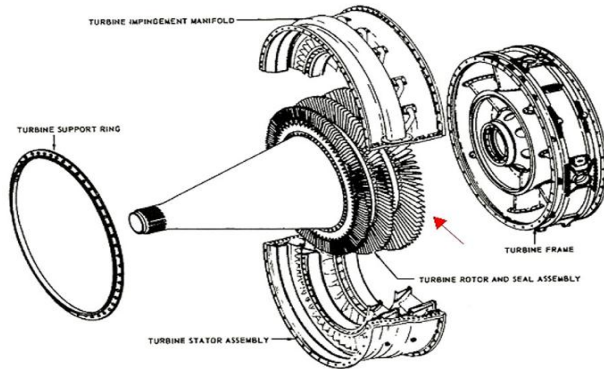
Schematic illustration of the turbine section of the turbojet engine [11, 12]. Note: The arrow indicates the location of the blade failure.
